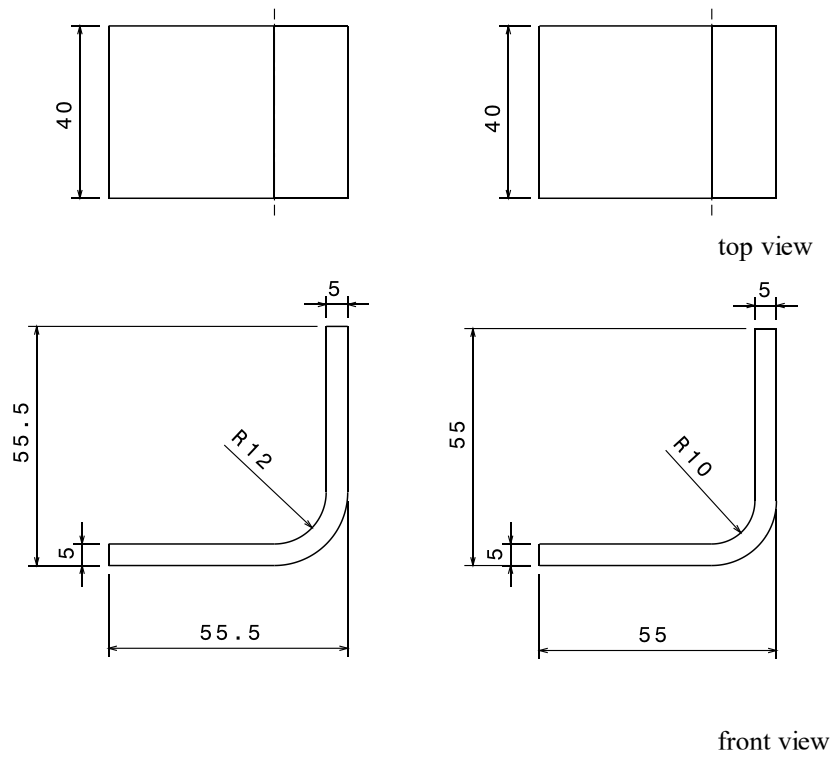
Technical drawing of the preform positioning device showing the top view and the front view.
